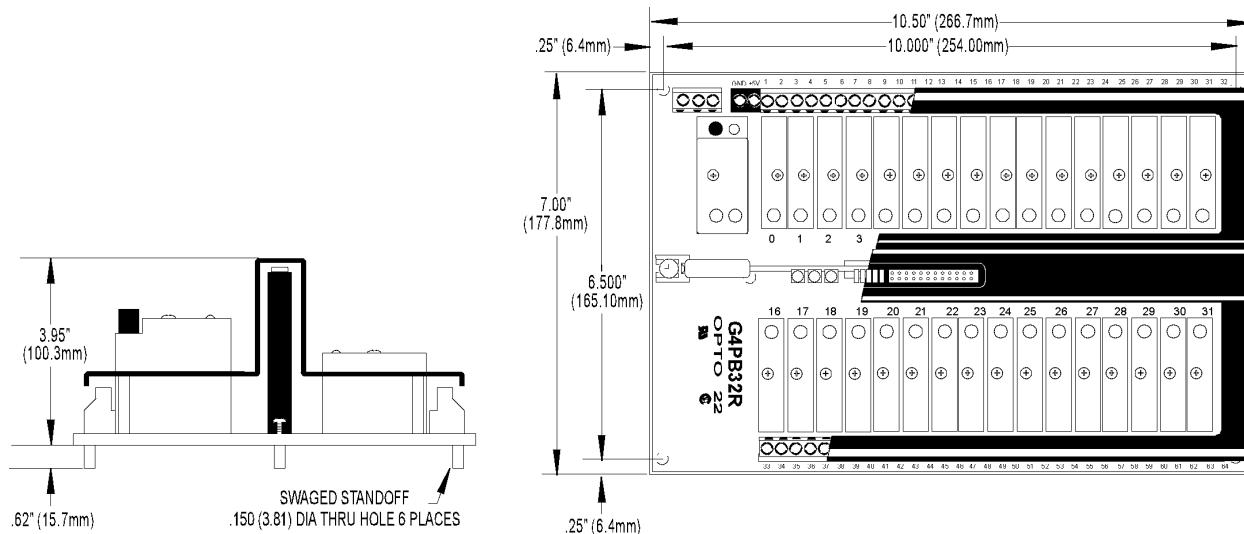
G4D32RS DIMENSIONS AND MOUNTING INFORMATION
